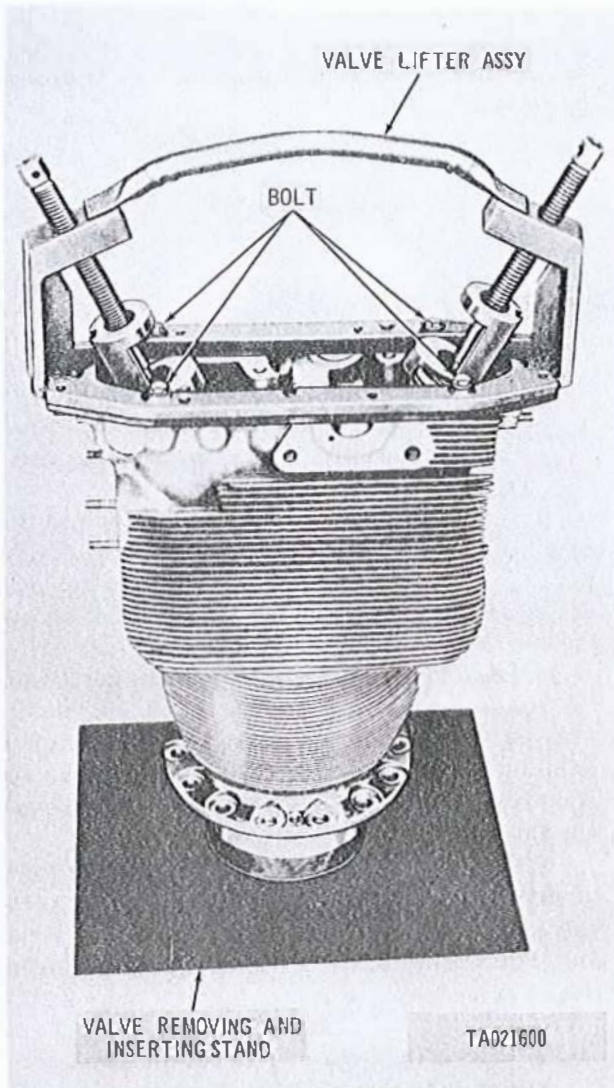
Cylinder showing position of valve lifter assembly and removing and inserting valve stand.
